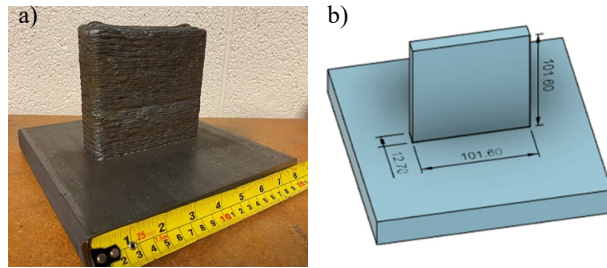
(a) Wall preform as printed on a baseplate; (b) wall and baseplate as modeled (dimensions in mm).
